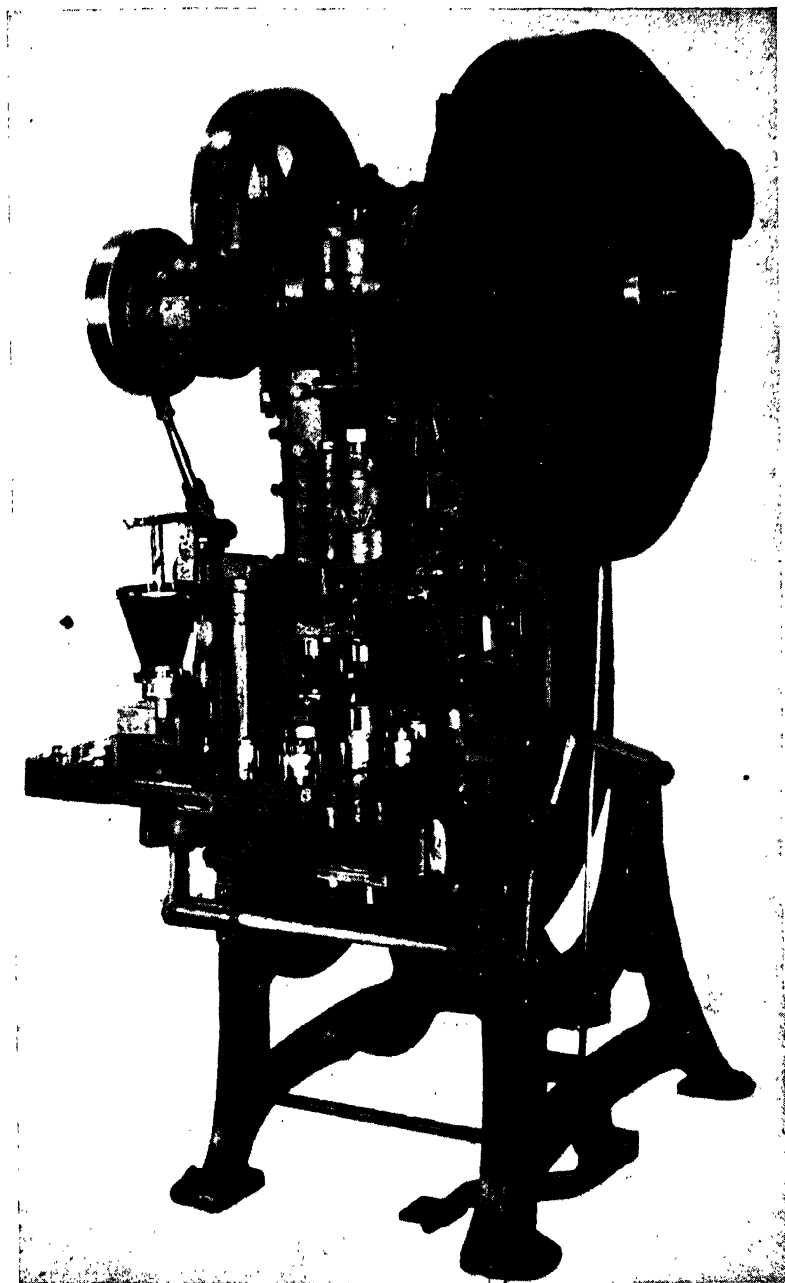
An interesting setup of a dial-feed punch and die for completing more than 1,200 assemblies of ball-bearing roller-skate wheels per hour. (Courtesy of F. J. Littell Machine Co.)
